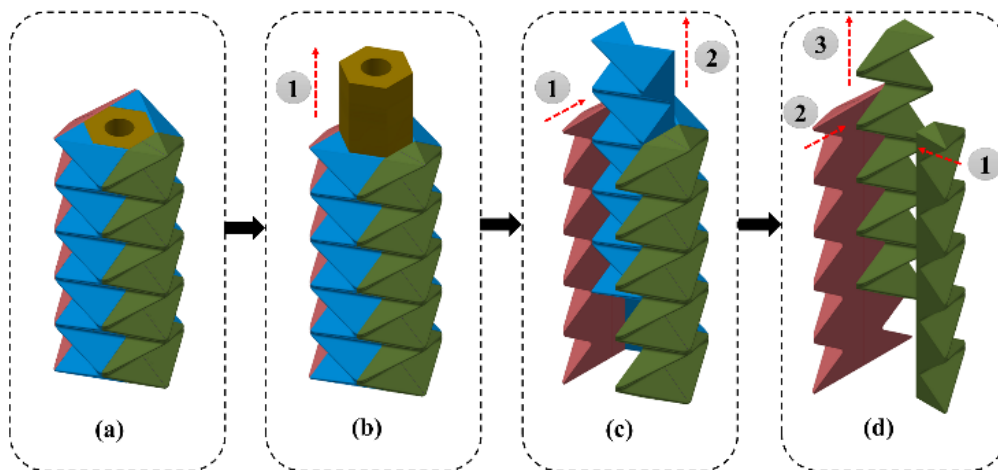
Removal steps for the seven-piece Yoshimura pattern mold. (a) CAD model of the assembled mold. (b) Remove the middle part first. (c) Slide each blue side piece over, then pull it out. (d) Remove the four red and green side pieces by sliding and pulling one at a time.
